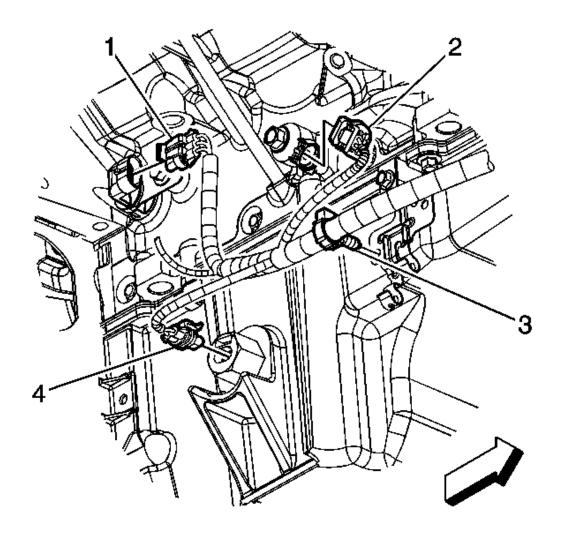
View Of Electrical Connectors & Clips Courtesy of GENERAL MOTORS CORP.
